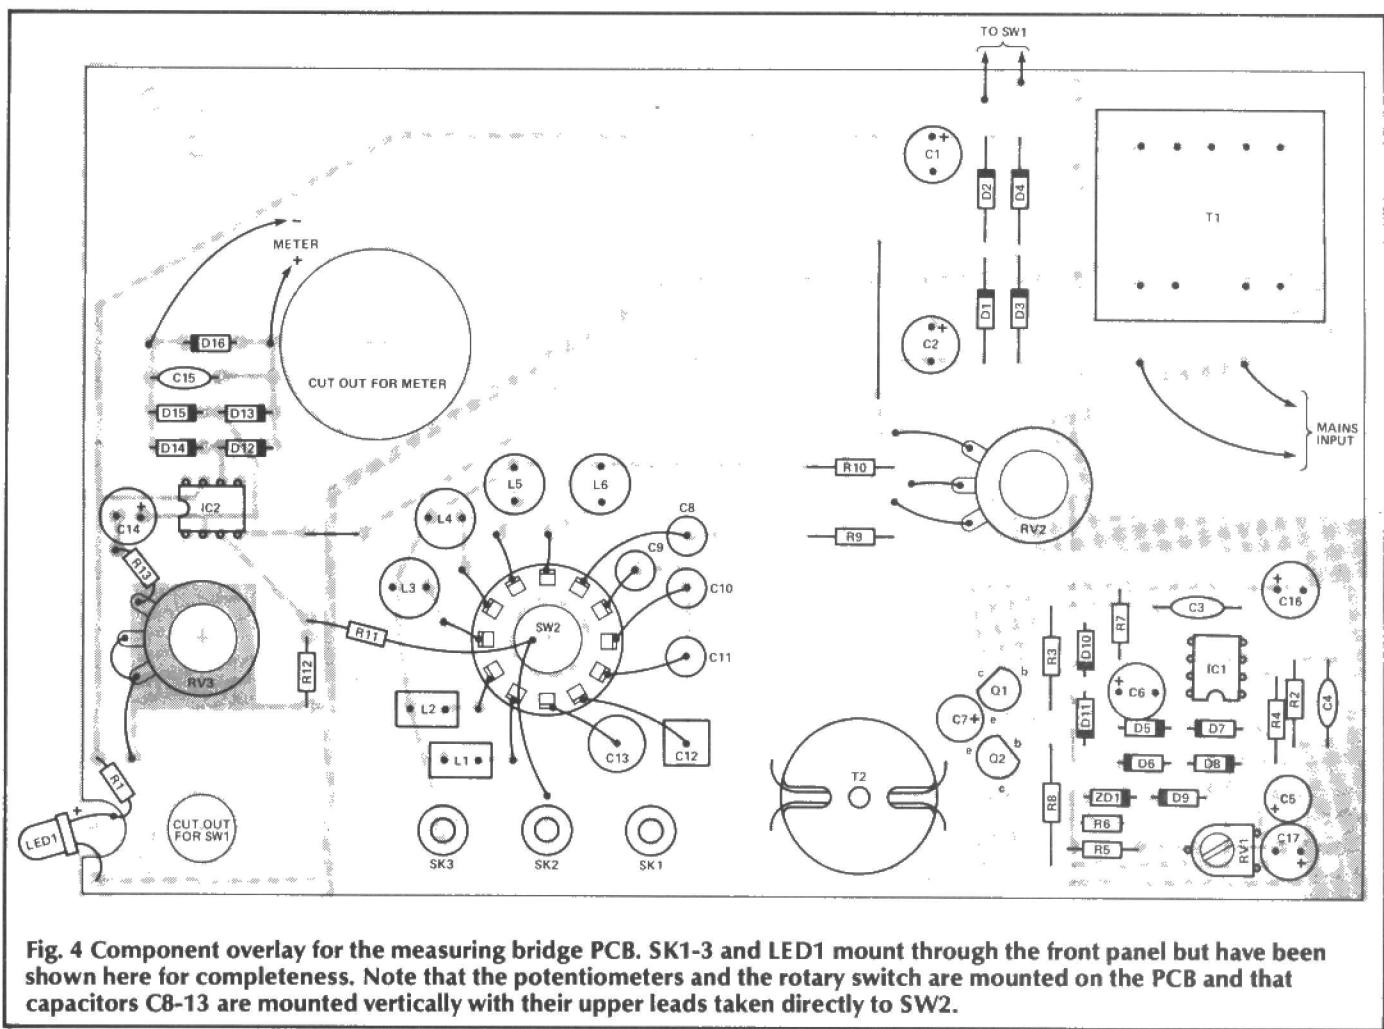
Component overlay for the measuring bridge PCB. SK1-3 and LED1 mount through the front panel but have been shown here for completeness. Note that the potentiometers and the rotary switch are mounted on the PCB and that capacitors C8-13 are mounted vertically with their upper leads taken directly to SW2.
